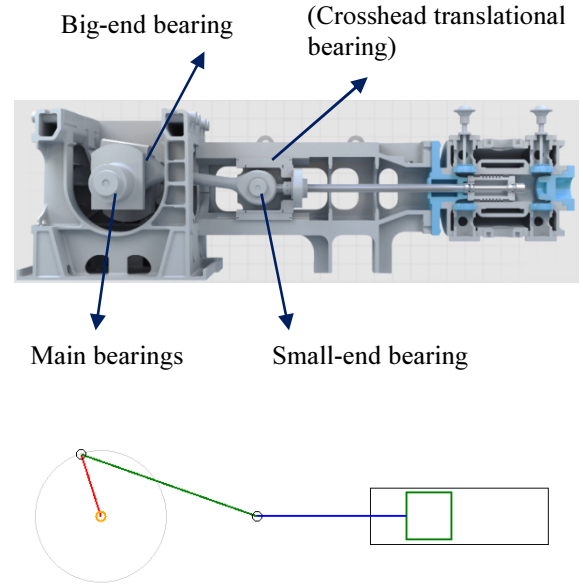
Model and schematic of crank mechanism reciprocating compressor including main bearings, big- and small-end connecting rod bearings and crosshead translational bearings
